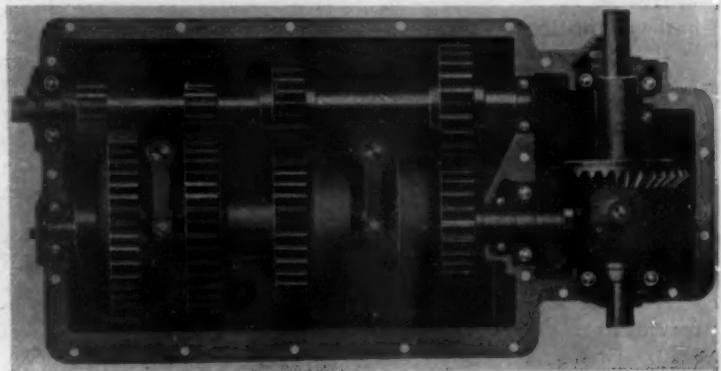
Thrust of bevels taken on bearings of collar type.
